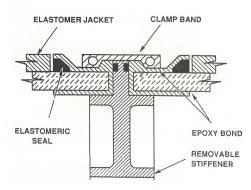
Mechanically Fastened Joint With Removable Stiffener For Cylinders
